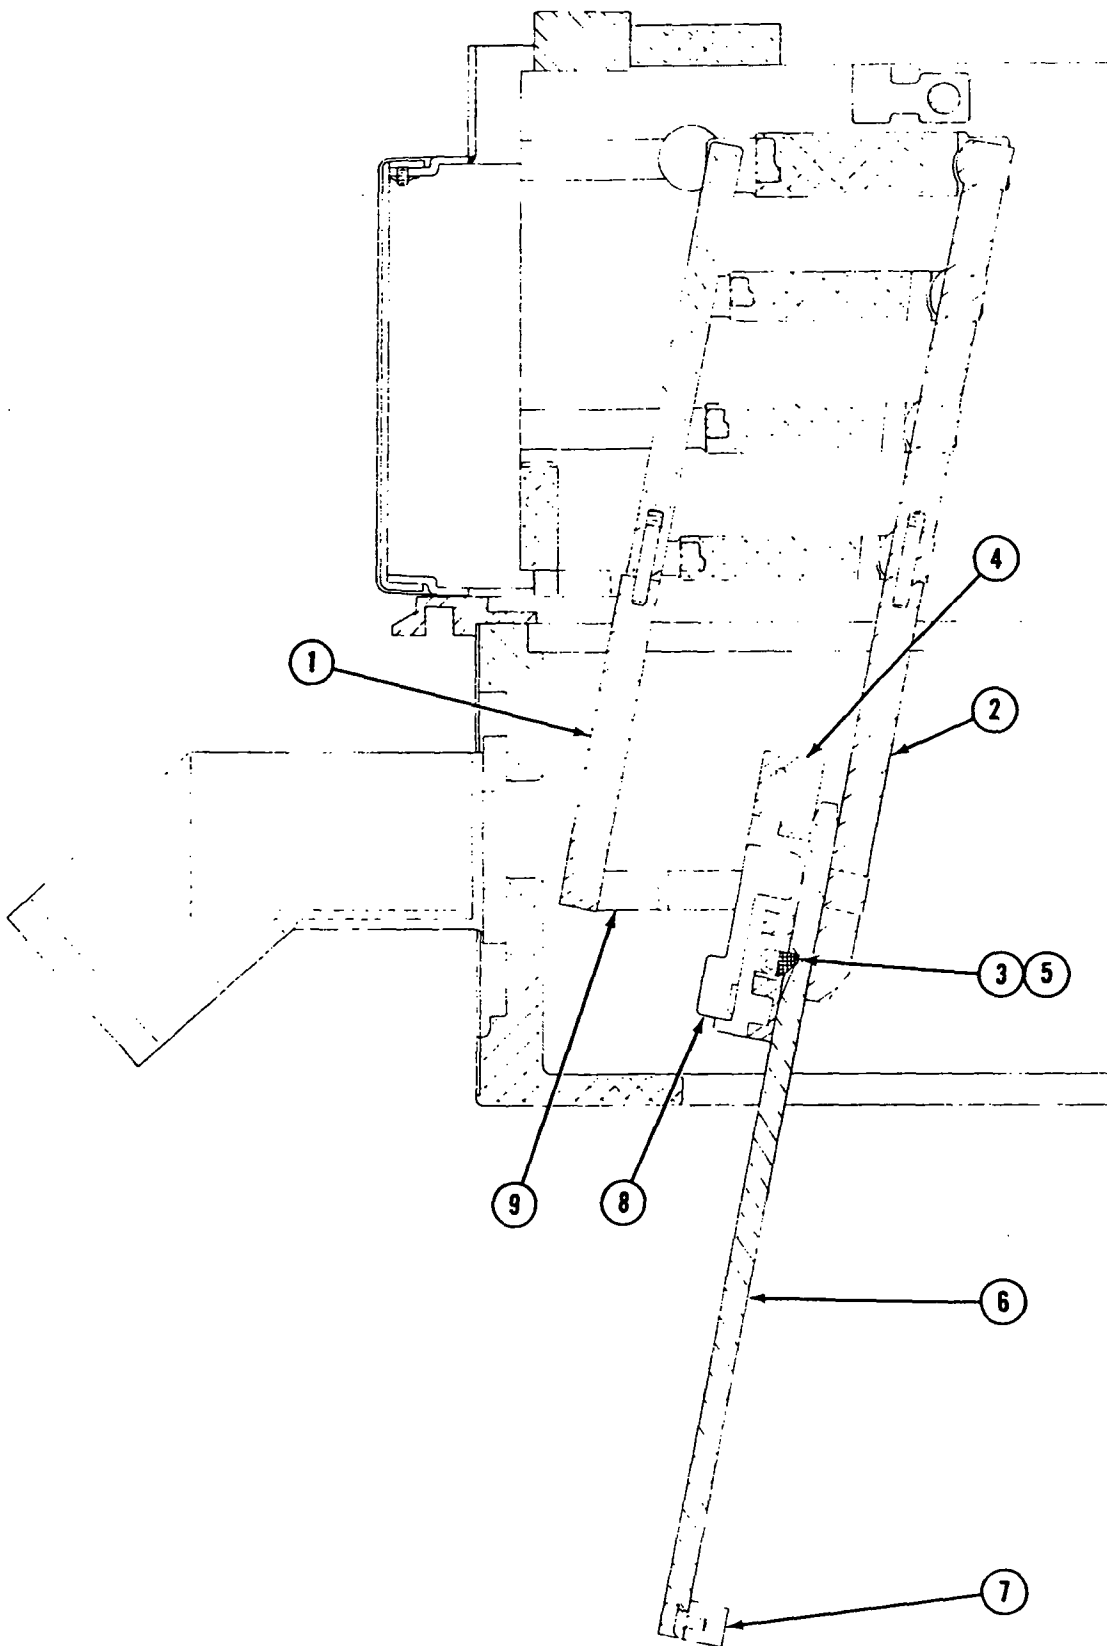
COBALT COLLIMATOR EXTENDER ASSEMBLY
